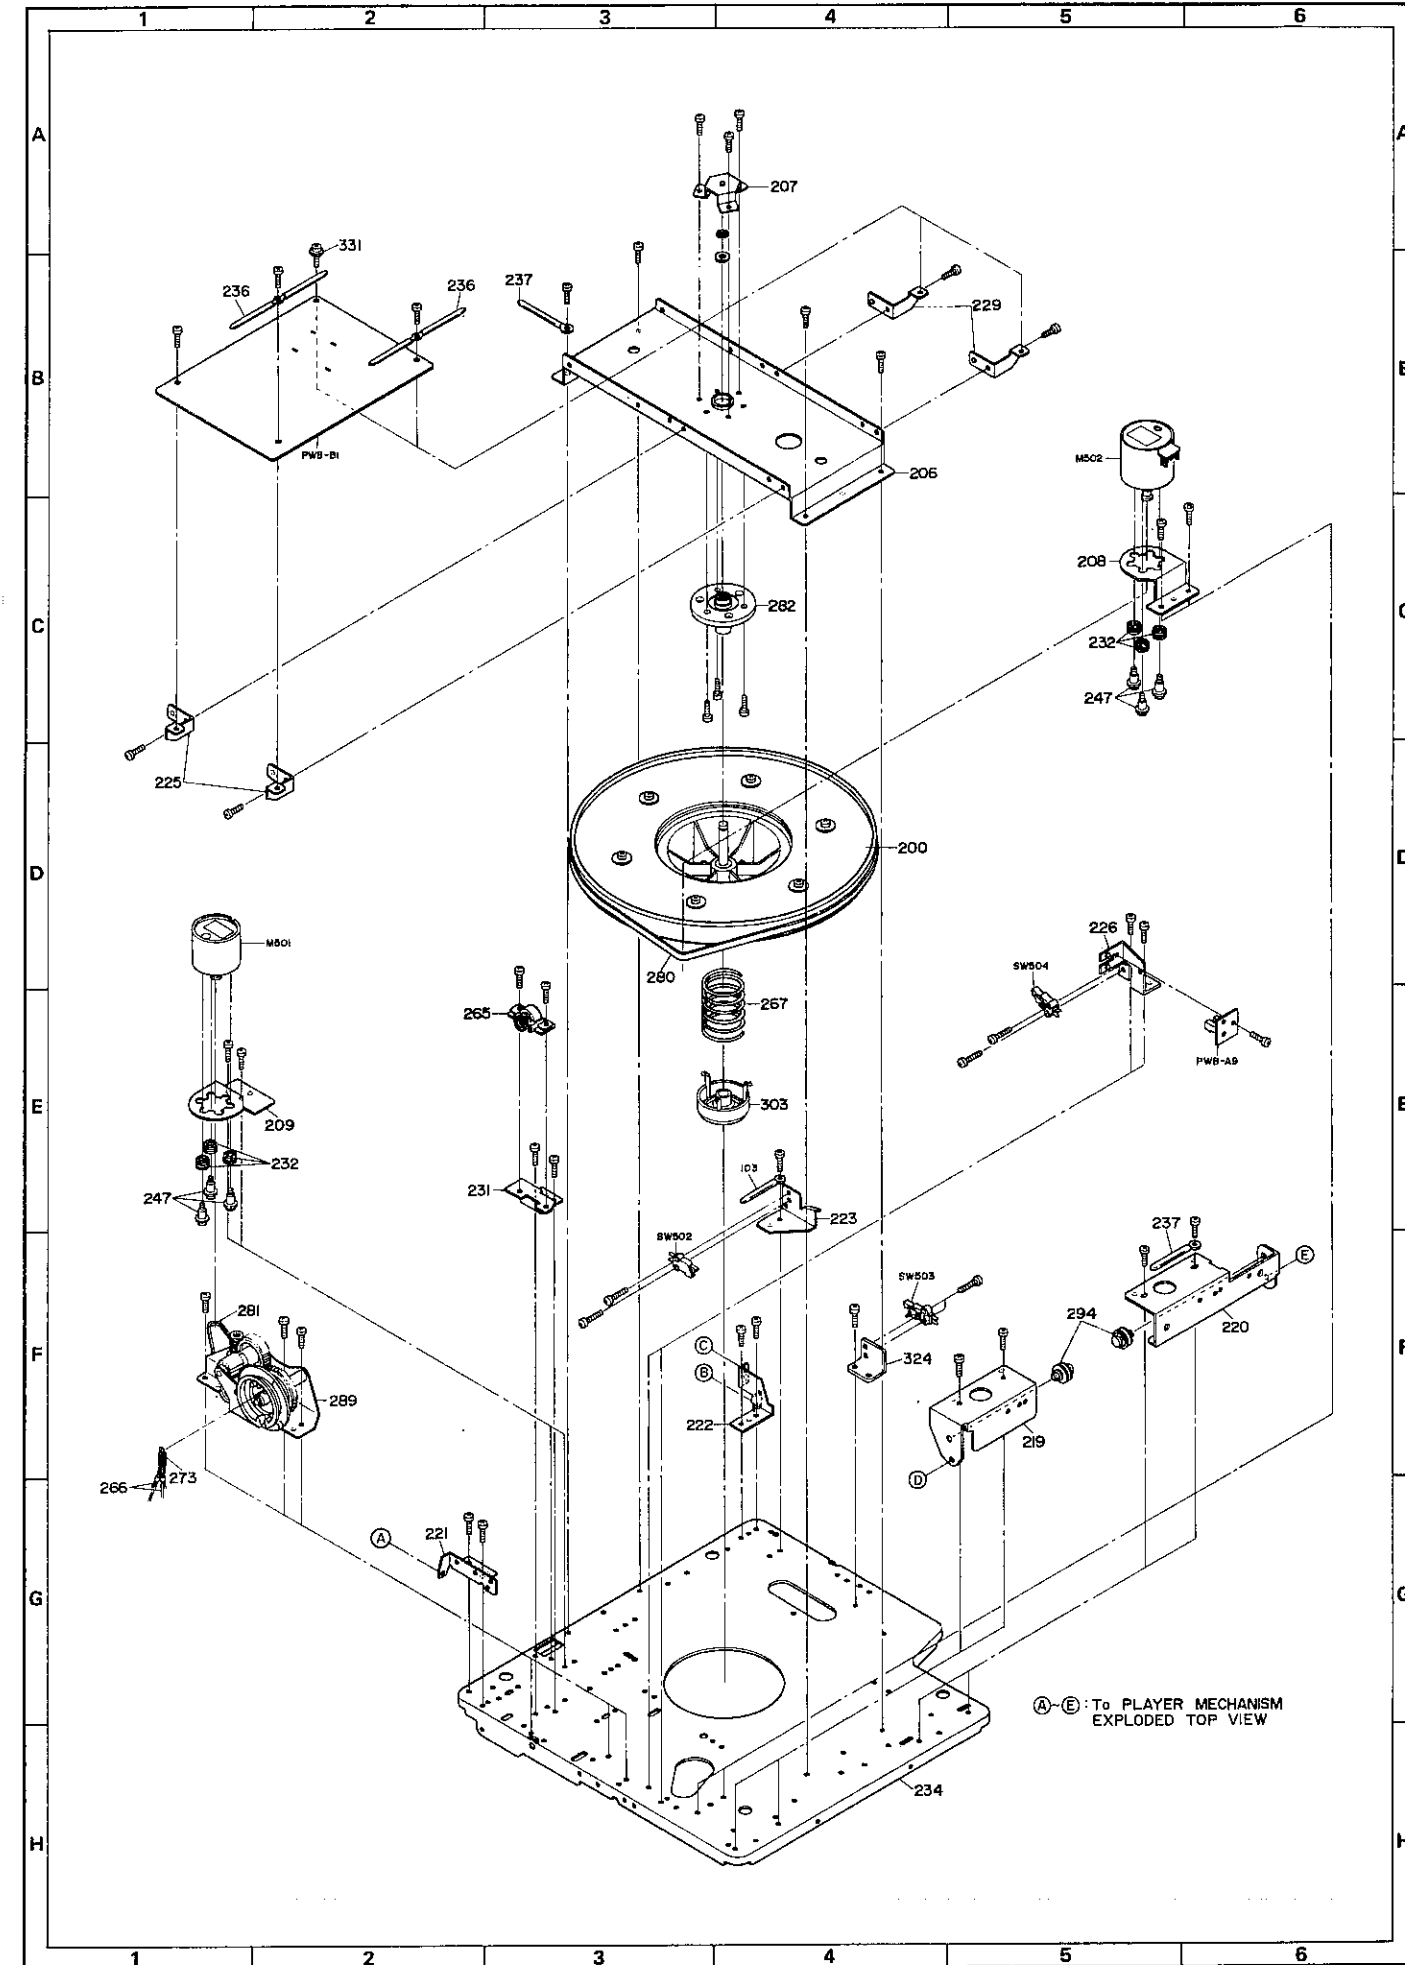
PLAYER MECHANISM EXPLODED BOTTOM VIEW
